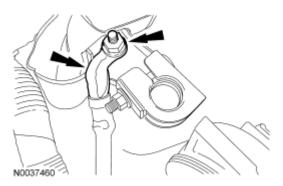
Locating Battery Cable And Nut Courtesy of FORD MOTOR CO.
